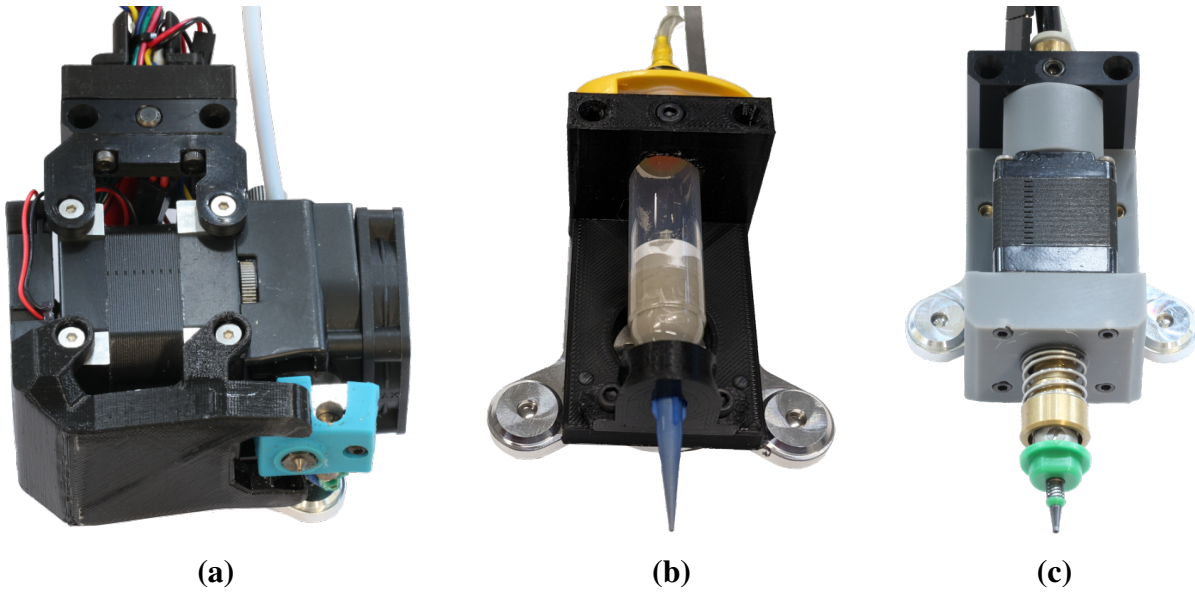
Three toolheads for the E3D ToolChanger: (a) The standard FFF printhead, (b) the conductive printhead for printing conductive traces, and (c) the pick and place tool for placing electronic components.
